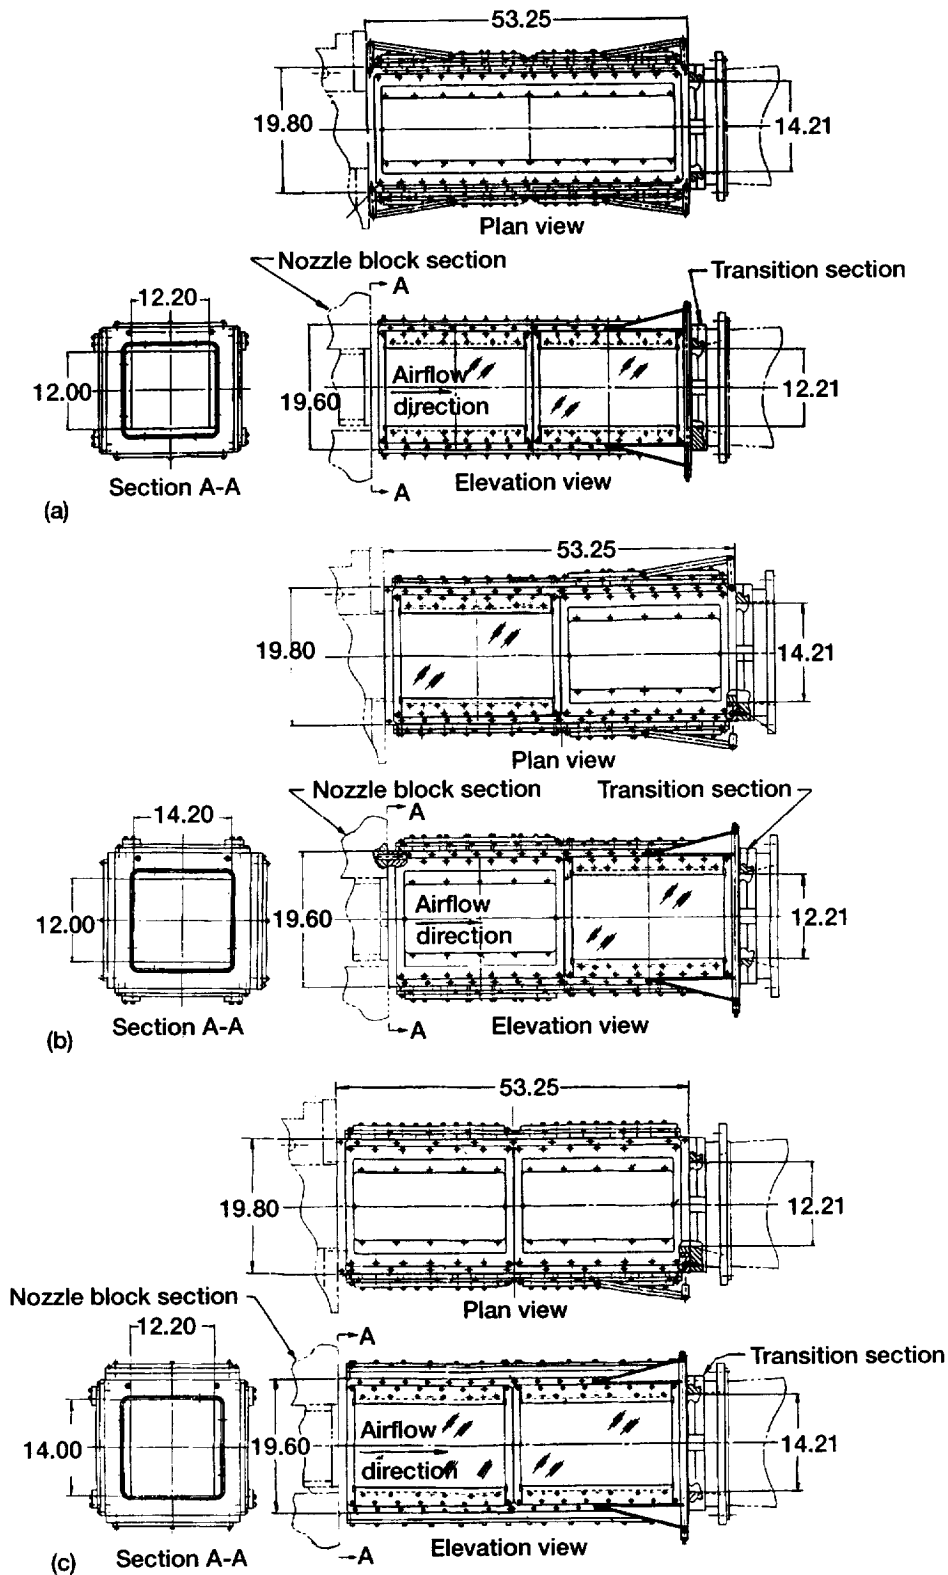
New test section. All dimensions in inches. (See ref. dwg. 28308M43A000, sheets 1, 3, and 4, available from the project engineer.) (a) 12.00-in.-high, 12.20-in.-wide, short wall configuration (see sheet 1 of 4). (b) 12.00-in.-high, 14.20-in.-wide, horizontally expanded wall configuration (see sheet 3 of 4). (c) 14.00-in.-high, 12.20-in.-wide, vertically expanded wall configuration (see sheet 4 of 4).
